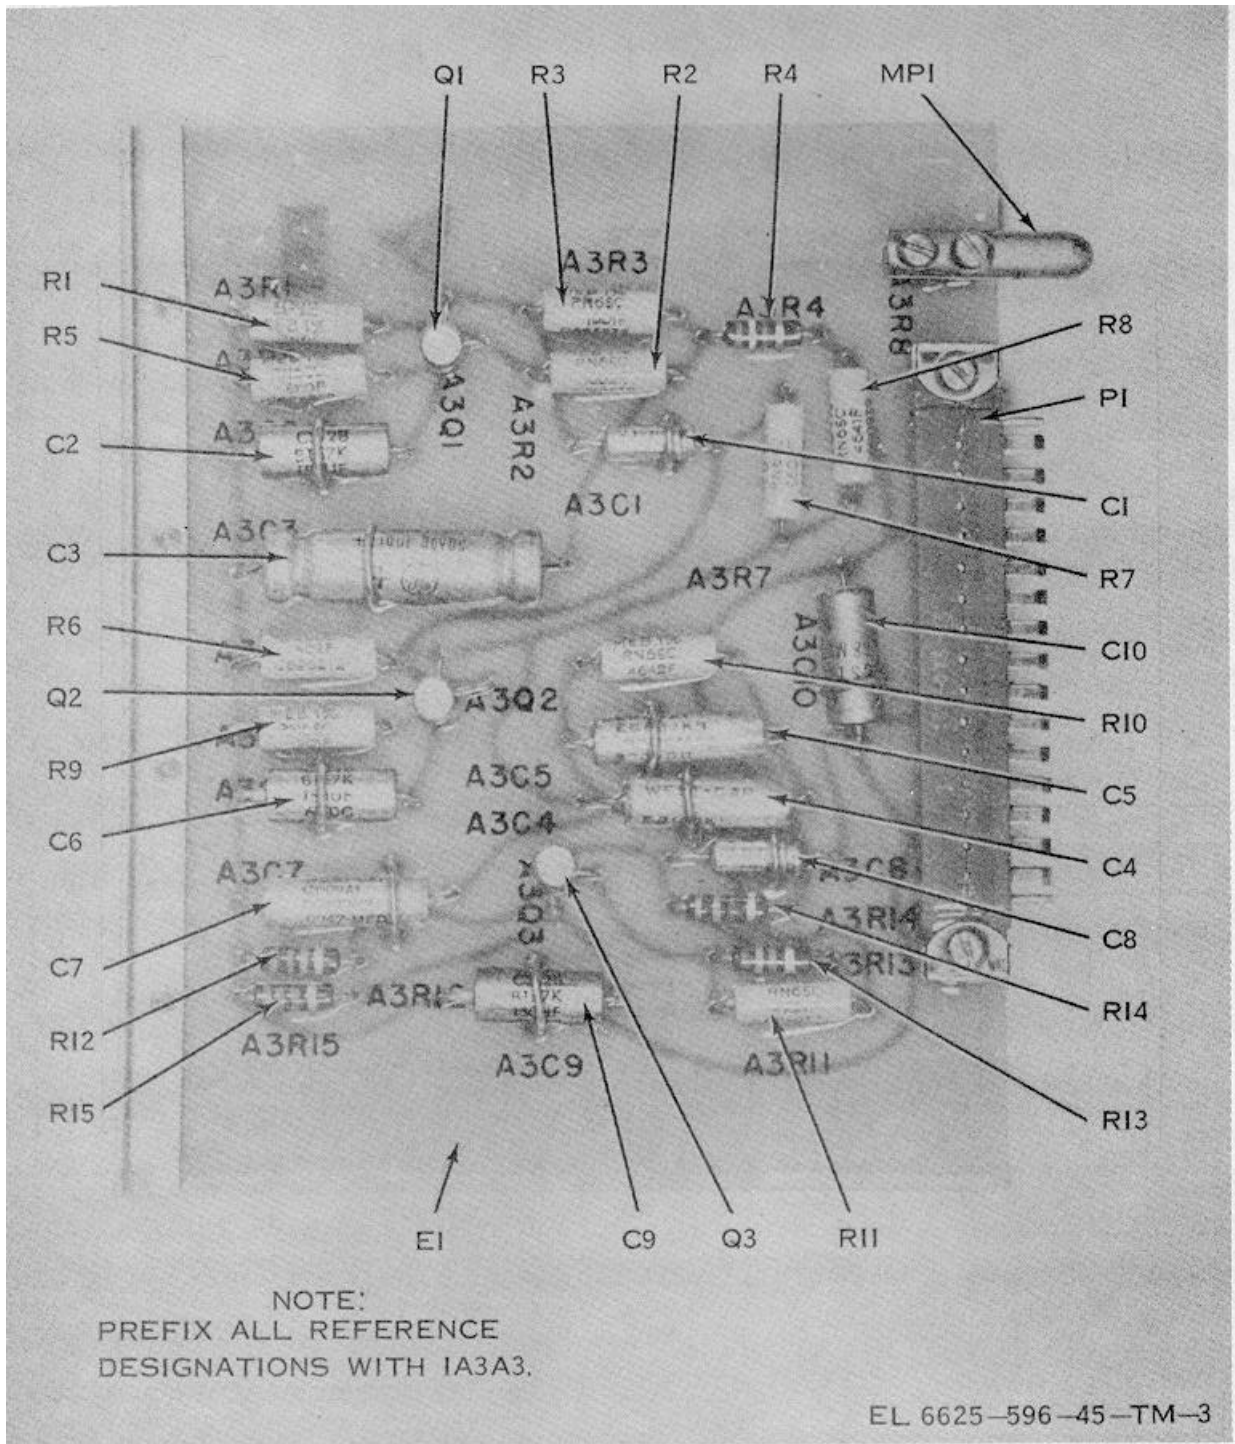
Noise generator assembly 1A3A3, parts location.
